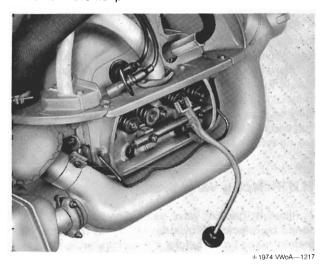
VW tool 653/2 being used to remove valve spring with cylinder head installed.
